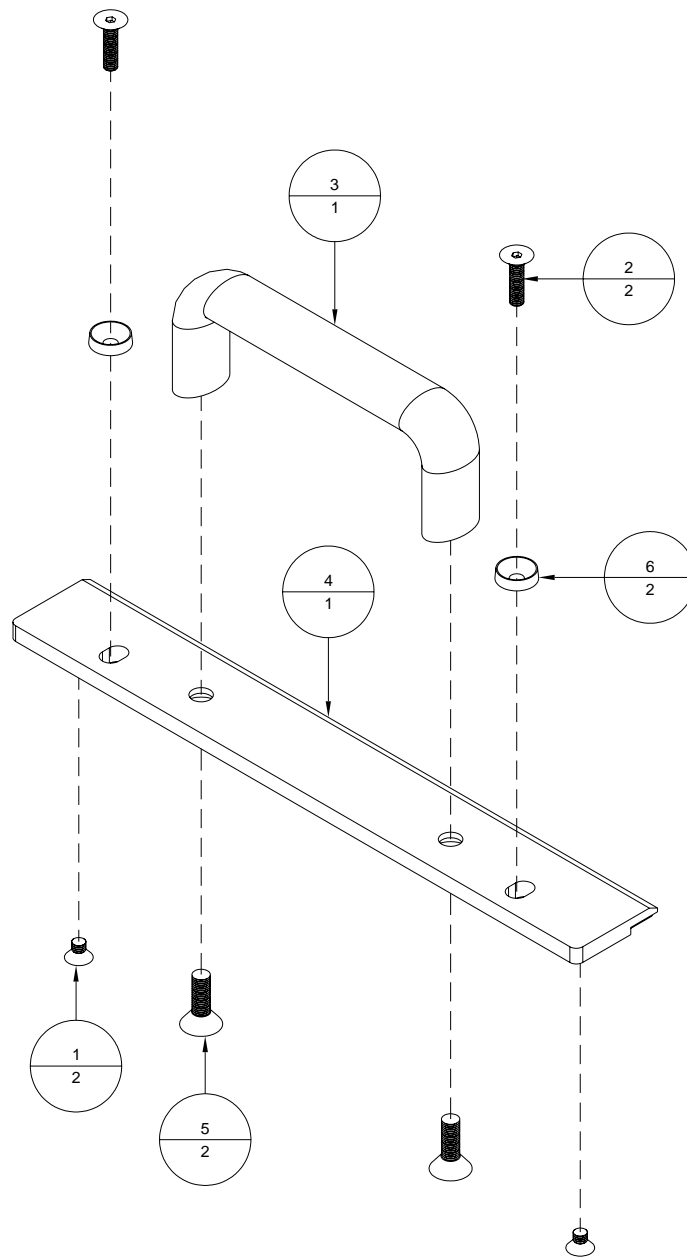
Side Bracket Assembly, Rack, BK1700 (9103004A)
